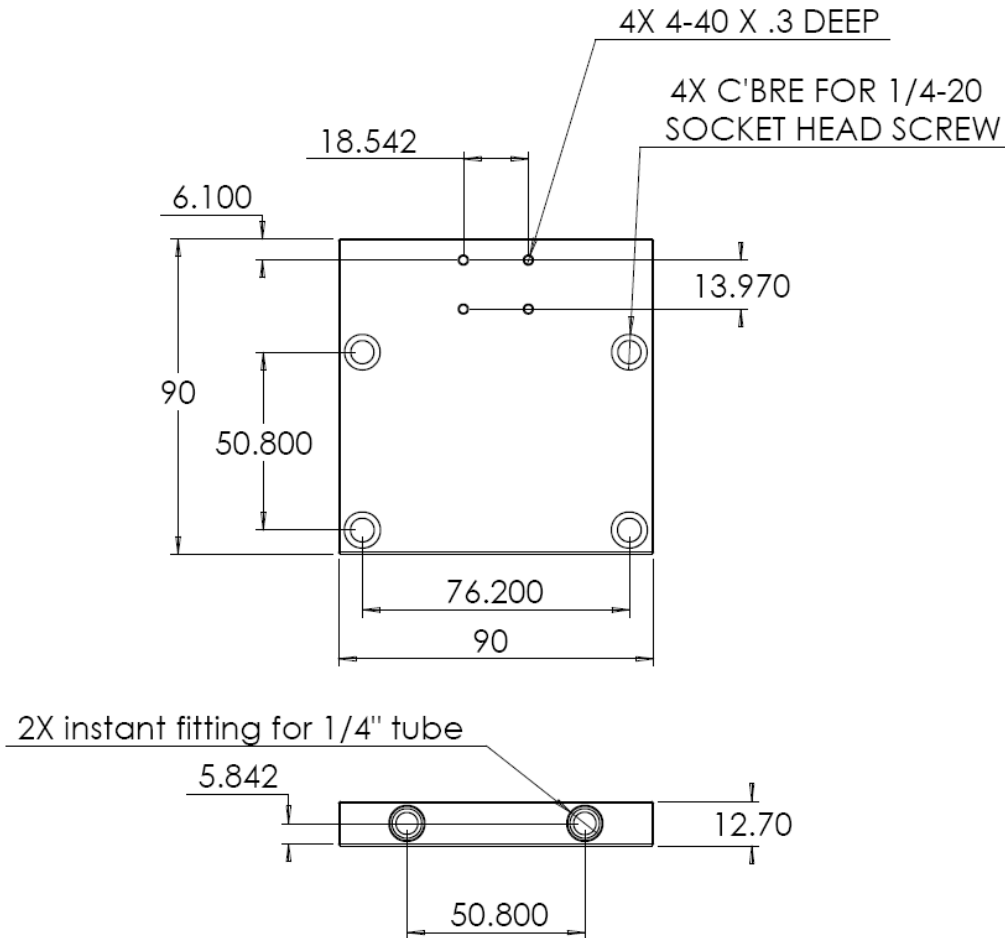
Outline dimensions of WP-01 (Dimensions in mm)
